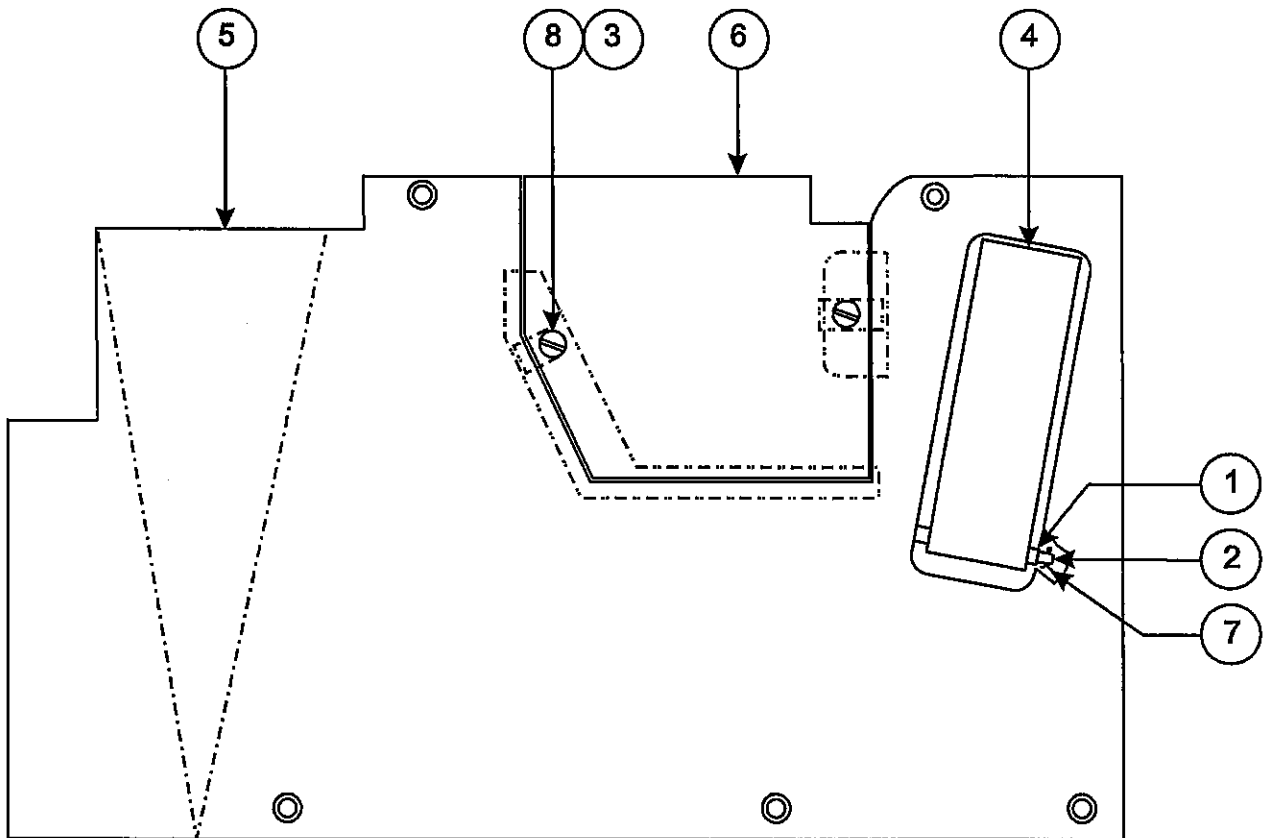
Pivot Cylinder Assembly, p/n; 1400601-A
